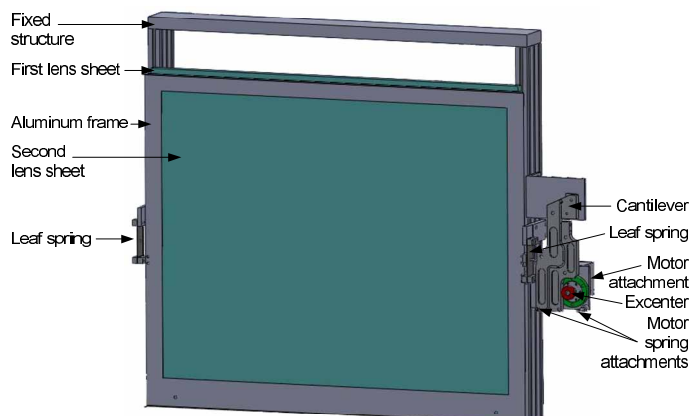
CAD drawing of the moving mechanism. The moving lens sheet is part of a mass-spring system.
